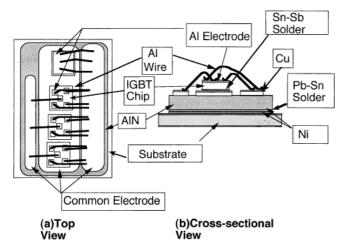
Schematic illustration of (a) a plane view and(b) a cross-sectional view of an IGBT module.
